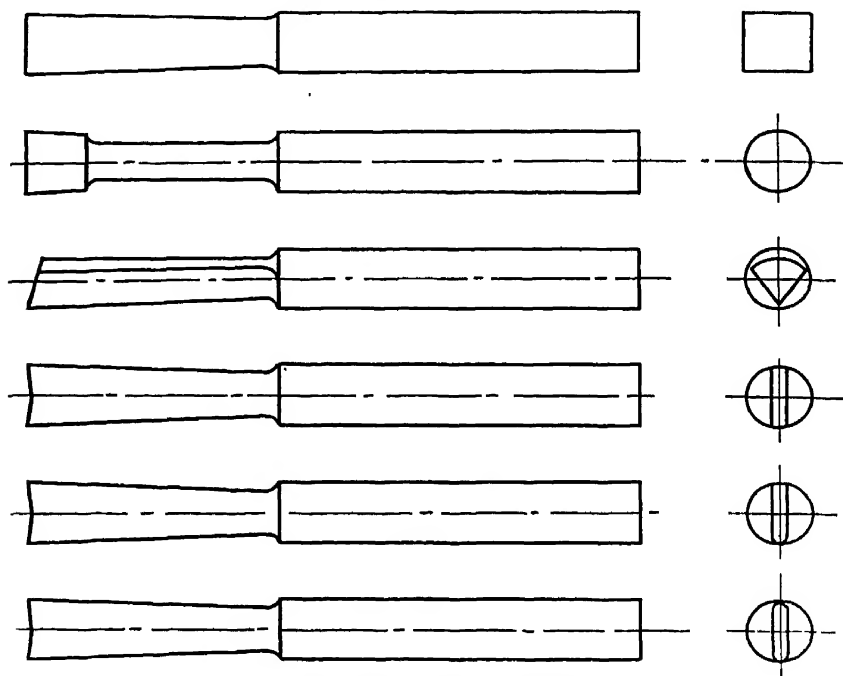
SMALL SLOTTING MACHINE TOOLS
